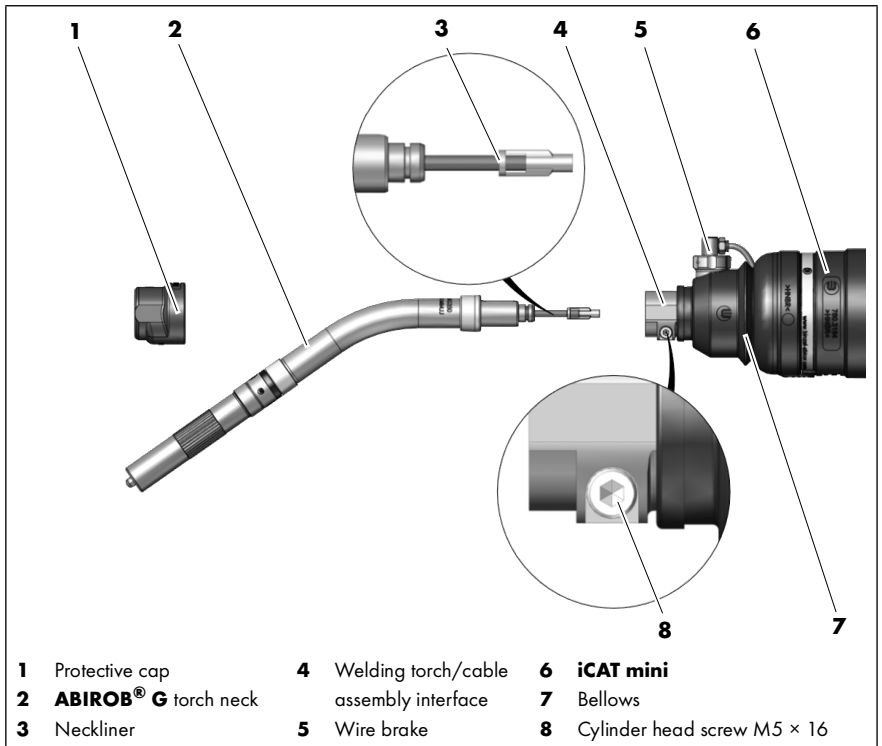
Mounting the welding torch neck ABIROB® G (iCAT mini with wire brake)
